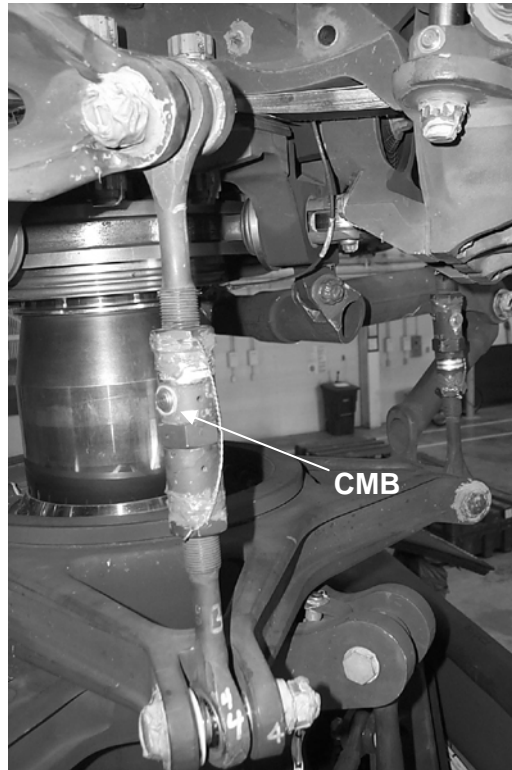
Main Rotor Pitch Link Assembly (AH-64A/D) with CMB Installed
